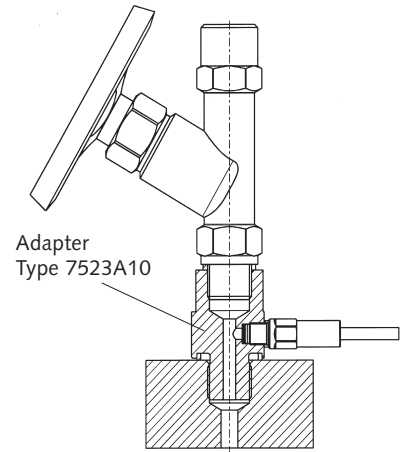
Sensor installed with adapter Type 7523A10 underneath the indicator valve
